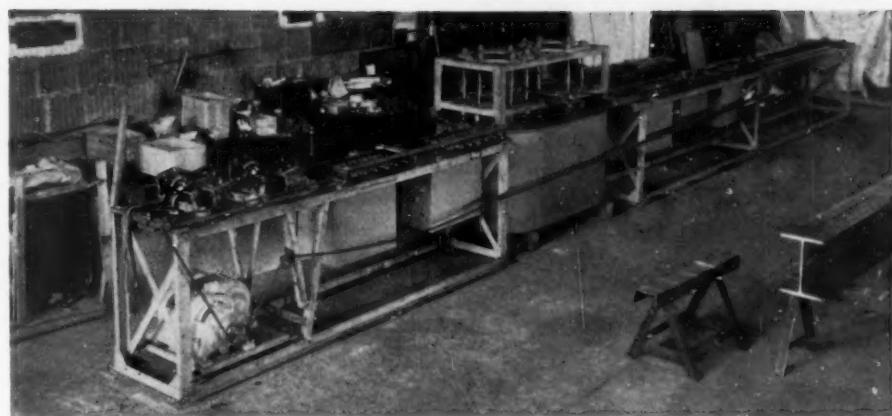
Zipper plating machine, assembled, but before installing the moisture removers in tail end (left foreground of illustration)
